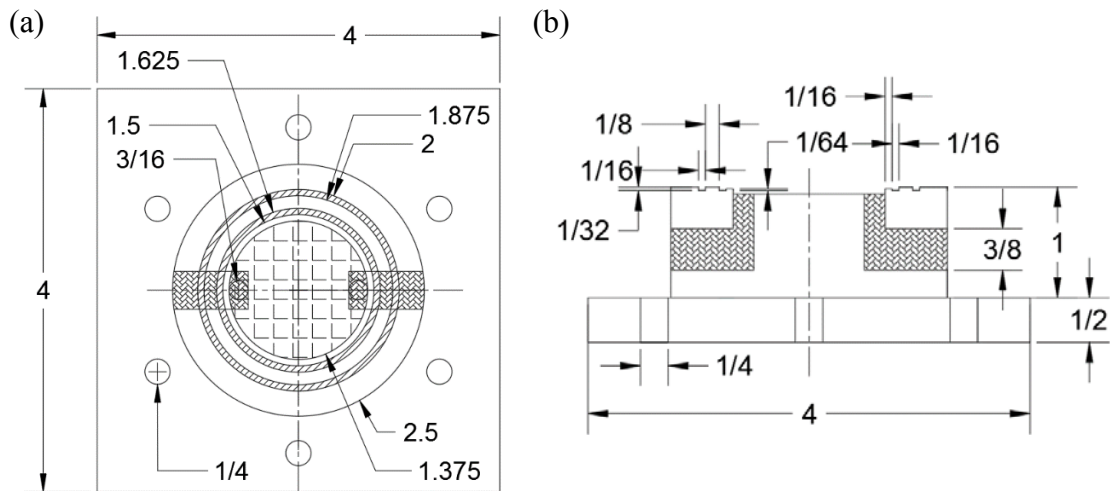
Top view (a) and side view (b) schematic of the flat membrane cell or module with dimensions in inches.
